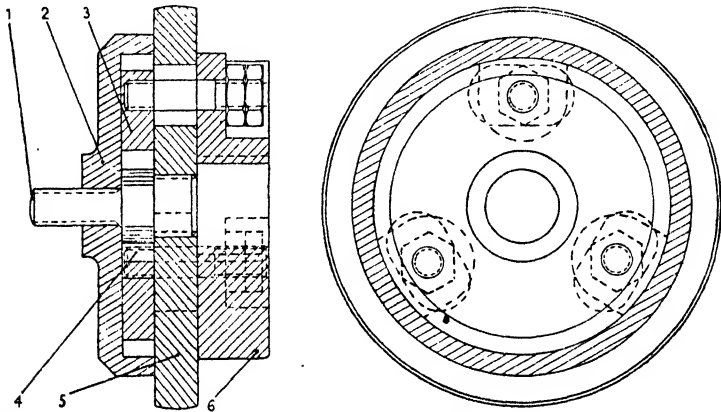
Special eccentric chuck for holding the diamond supporting chucks
